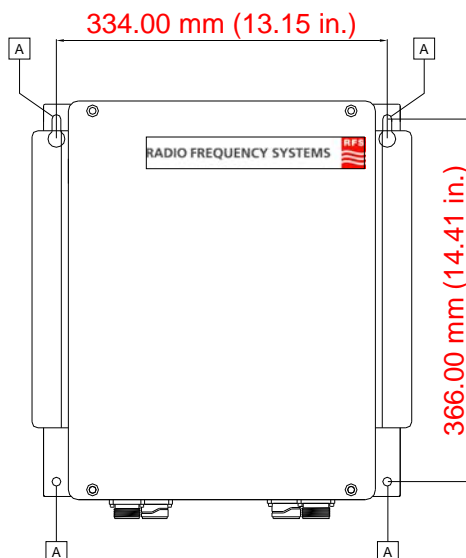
POSITION OF THE HOLES IN THE SUPPORT BRACKETS FOR THE EQUIPMENT
